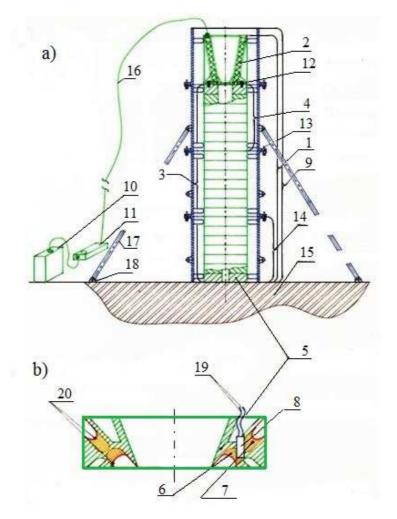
Complex ERC-21 (a – general view; b – destructible cassette): 1 – ERU -21; 2 – BEI; 3 –RO; 4 –RM; 5 – cassette curb the explosive charge and ED; 6-down-hole shaped charge explosive annular shape; 7 - clamping the shaped explosive charge annular shape; 8 ED; 9 – SD; 10 - IP; 11 – RCU; 12 – retaining ring; 13 – bracket; 14 – unit SD; 15- rock; 16 – electric cable; 17 – mounting rack; 18 – fastening the boots; 19 – power cord, from BEI to ED; 20 – cumulative funnel annular shaped charges of explosives
